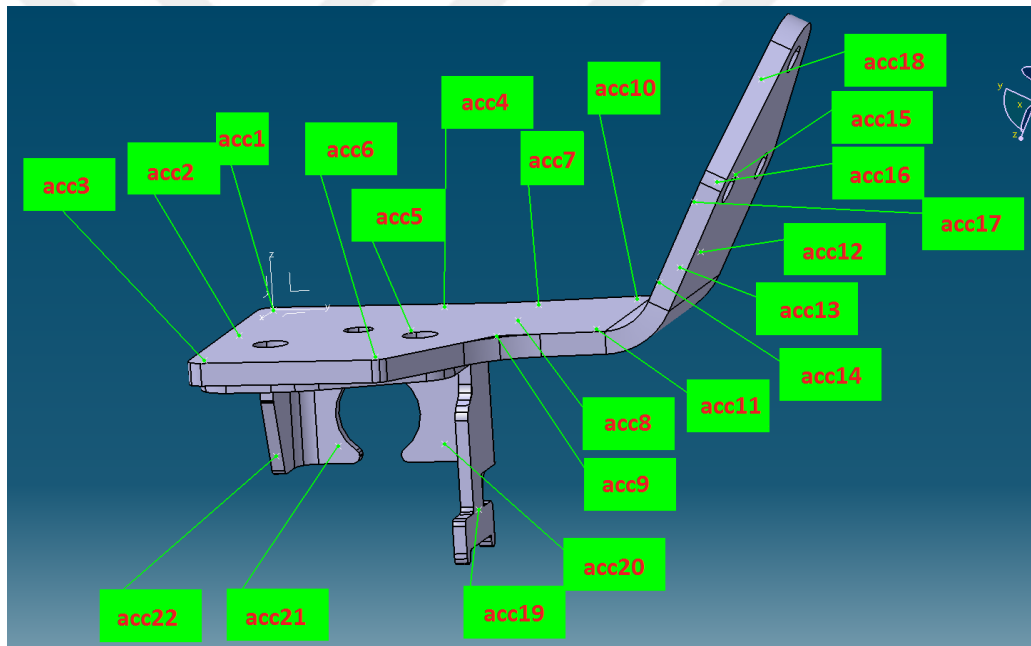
CATIA (CAD) measurement view for accelerometer positions.
